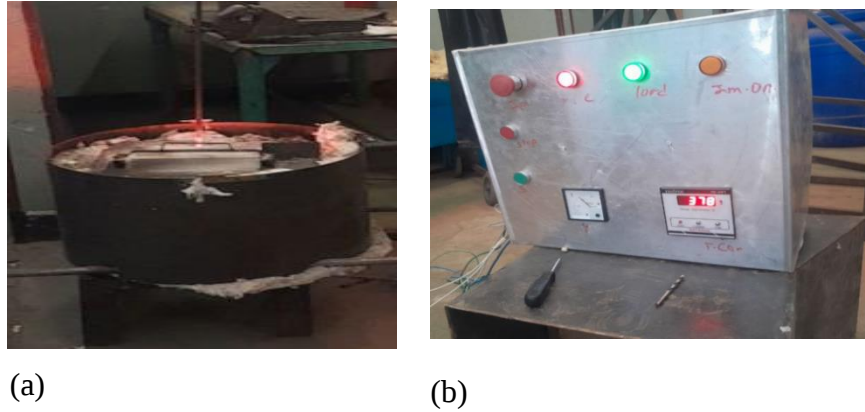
Stir casting set up A) Electrical furnace and B) Controller
